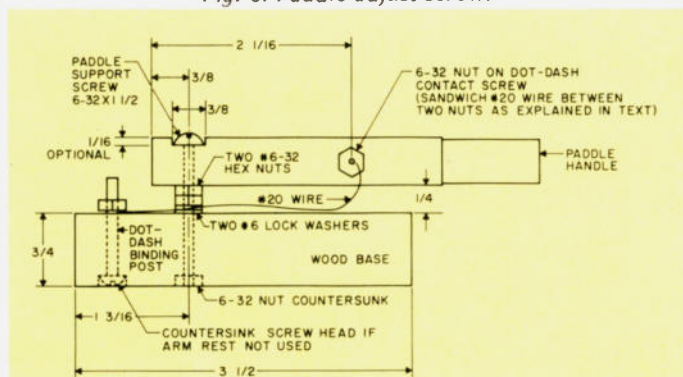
Assembly of paddle to base. This side view shows the main support screw detail.
